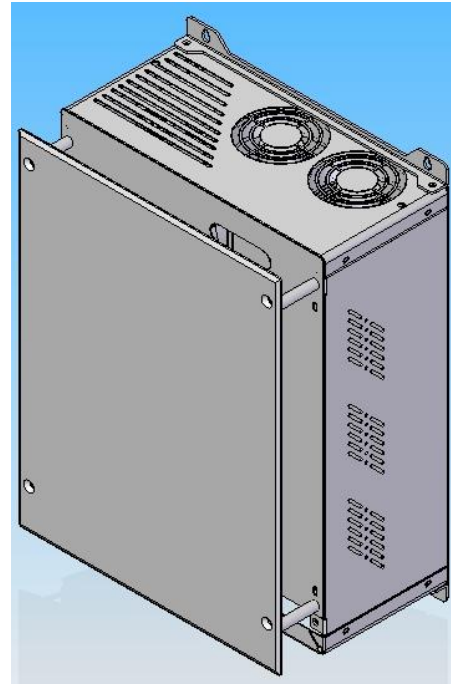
OPEN TYPE WALL-MOUNT
